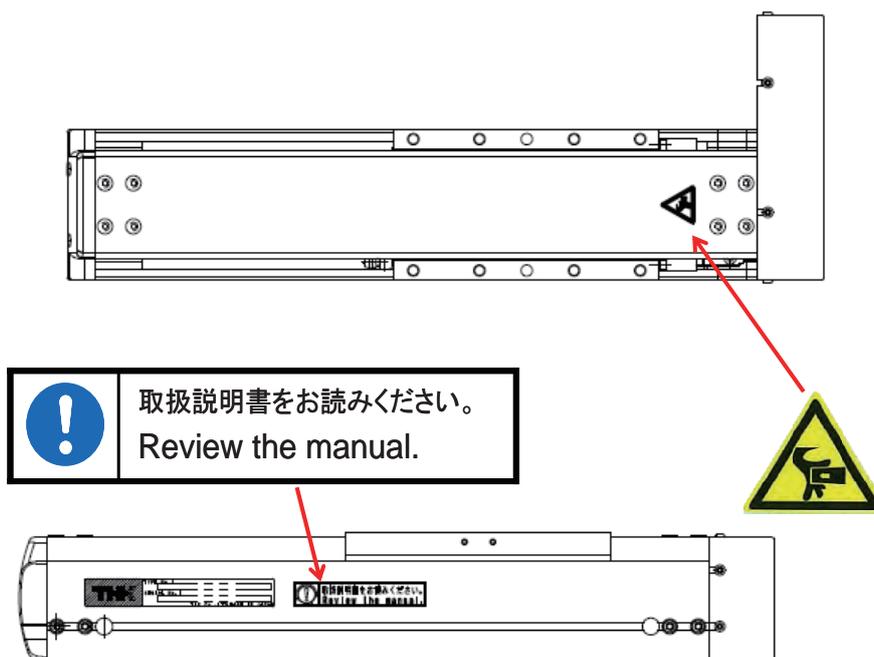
US6RT/8RT precautions/instruction labels affixing positions
